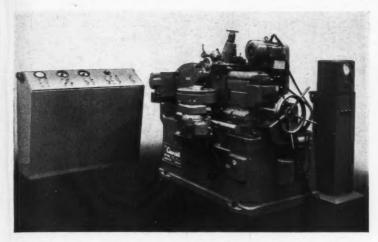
The Churchill type EC centreless grinding machine is here shown equipped with a rotary-type work loading unit and compressed air automatic size control equipment, and is set up for grinding needle rollers
